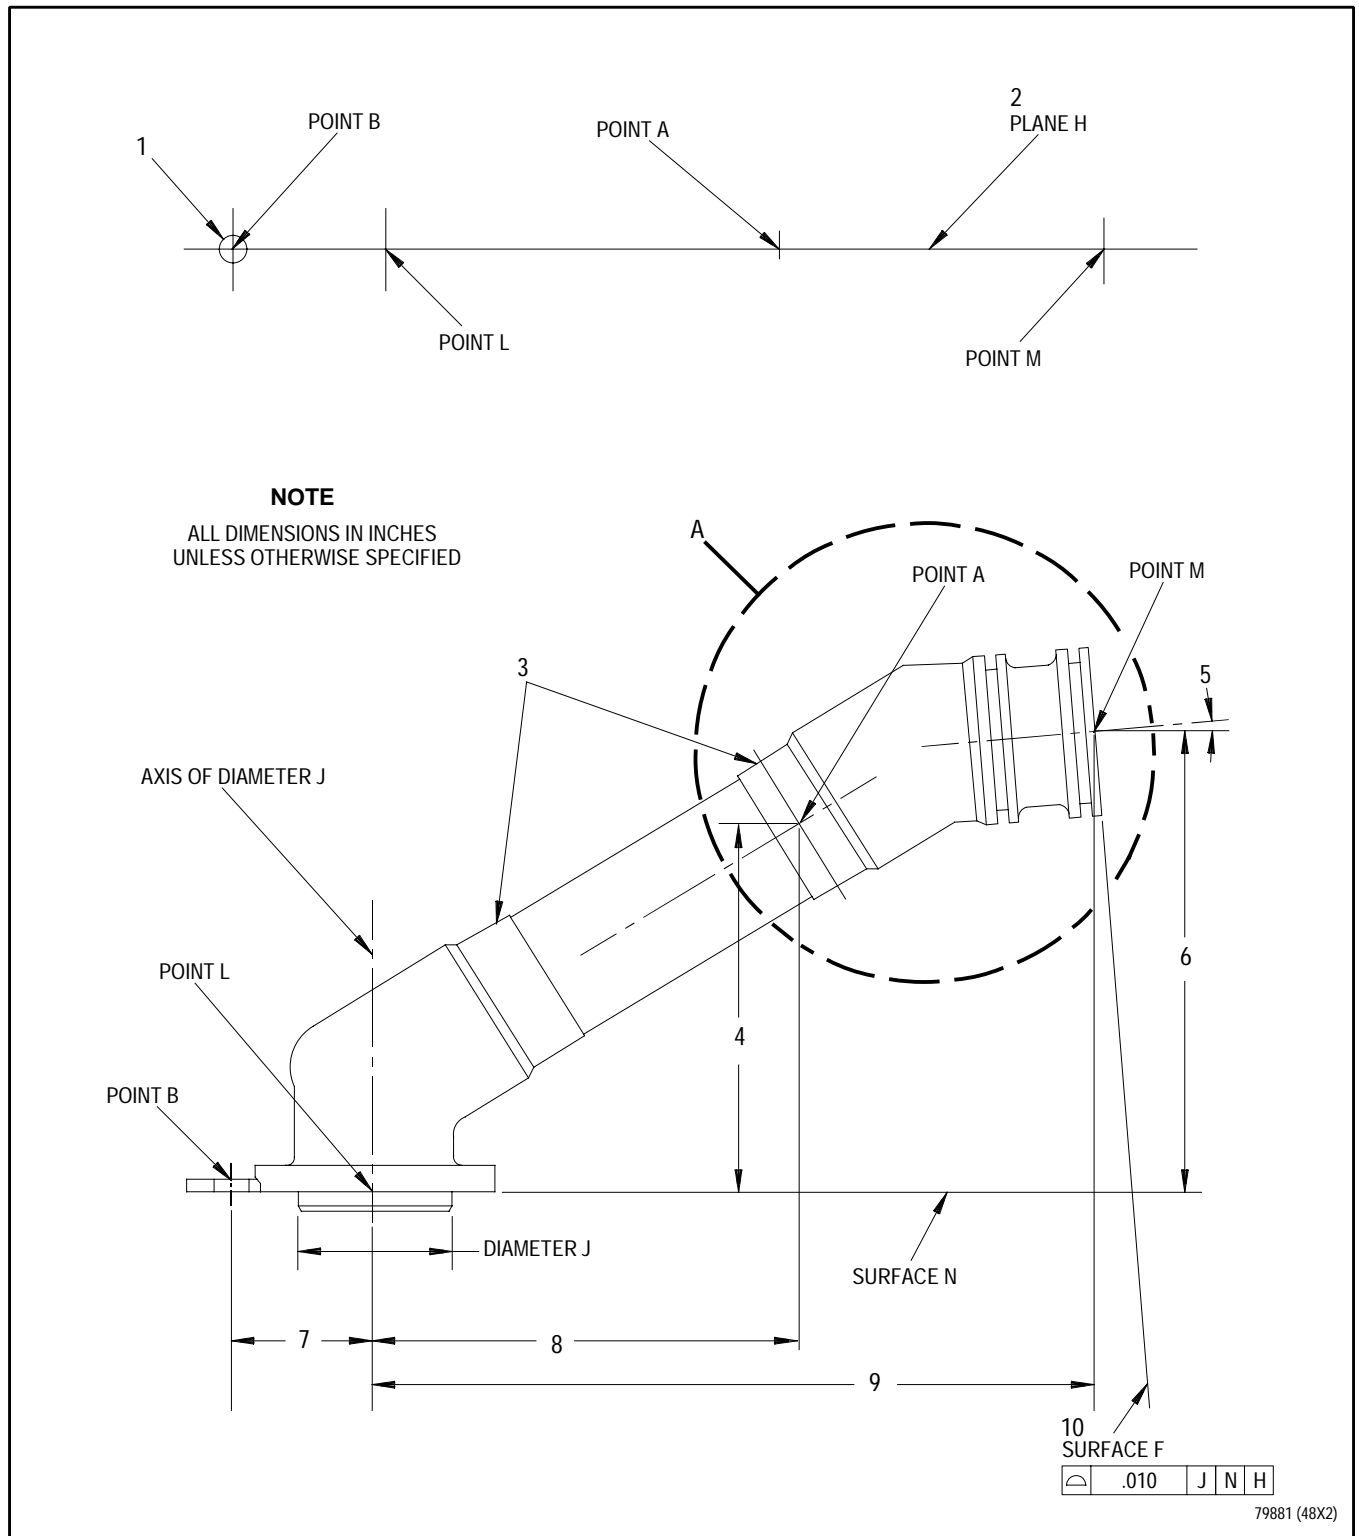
No. 4 Bearing Air Supply Tube Assembly - Ring Groove Weld Repair (Sheet 1 of 2)
